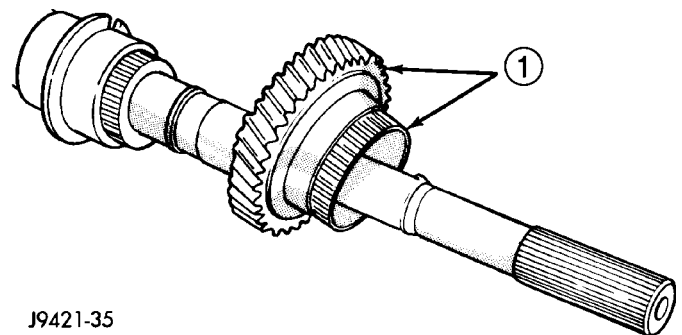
REVERSE GEAR AND NEEDLE BEARING
